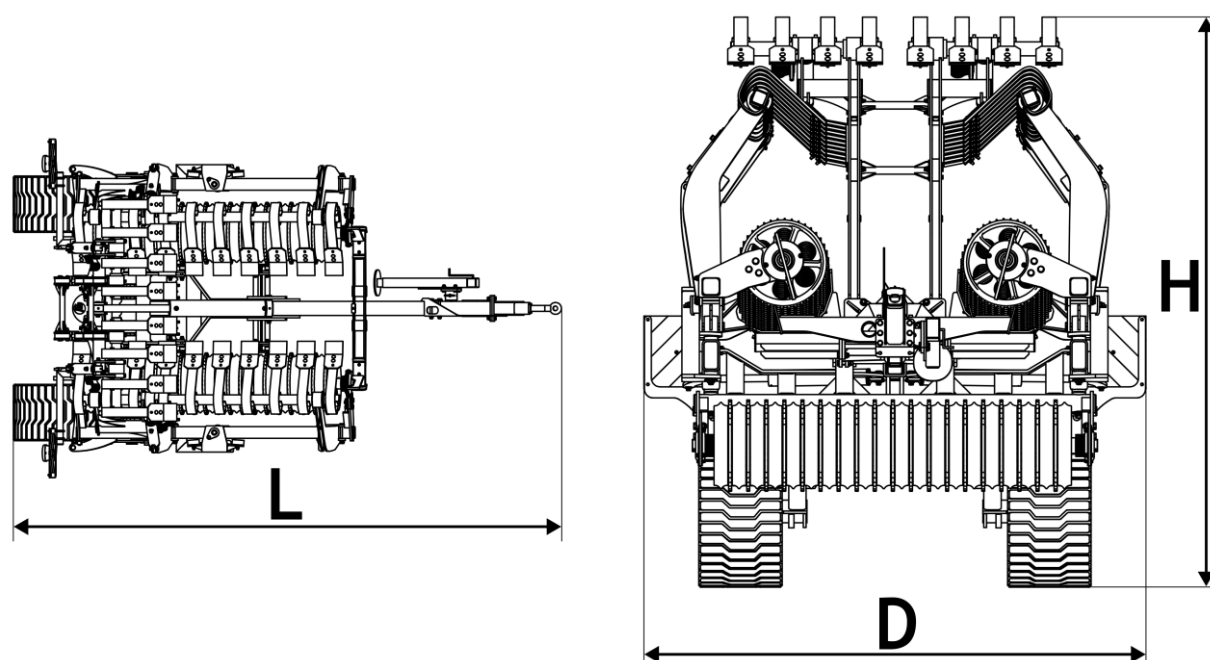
Transport dimensions of the roller MCB SWING 6,2H with harrow (D - width, L - length, H - height) (see table 3)
